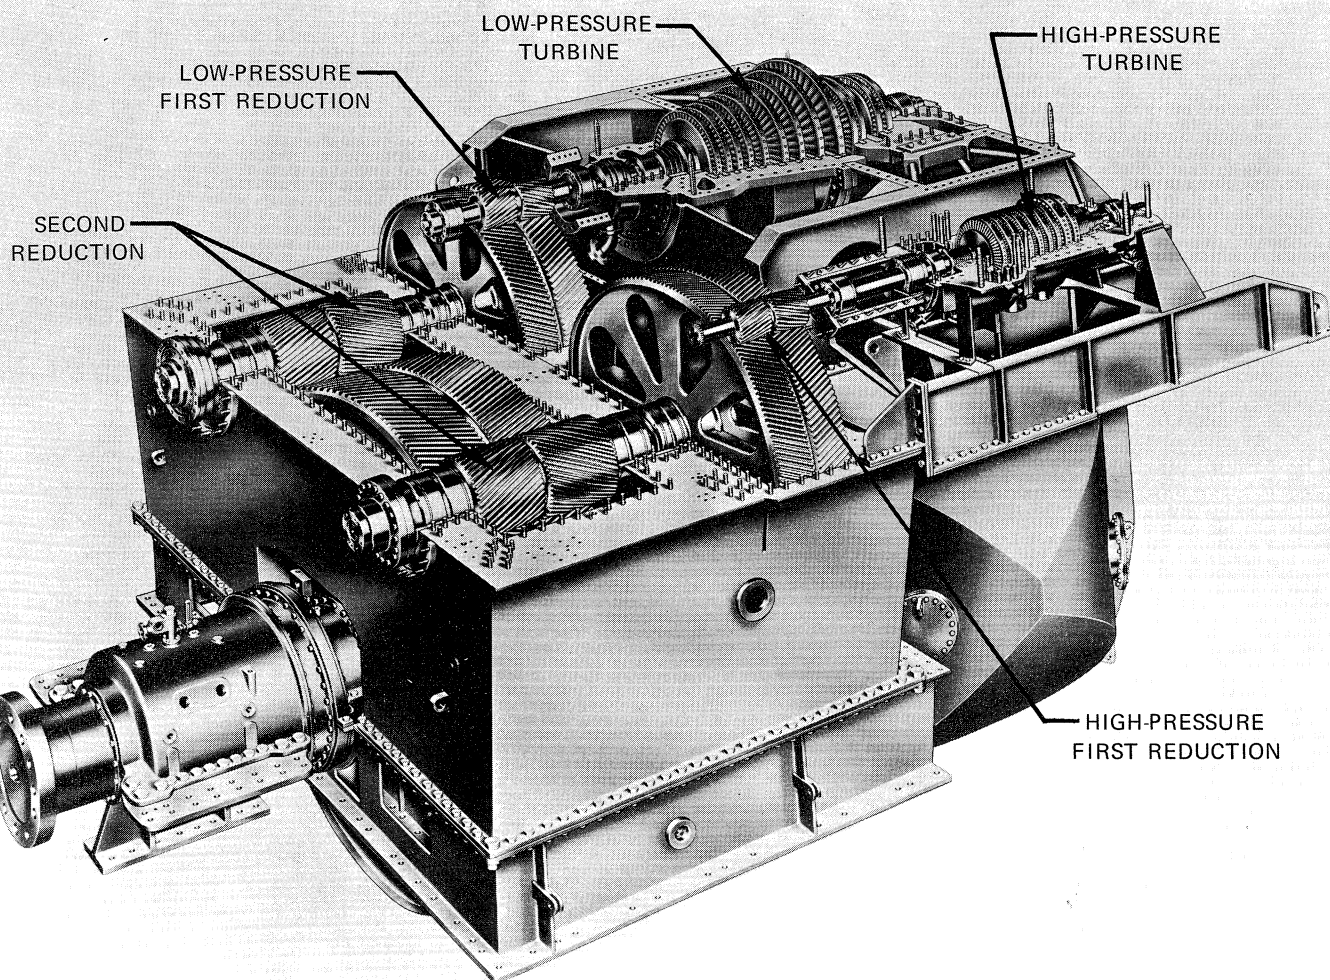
Courtesy Marine Div., Westinghouse Electric Corp.
